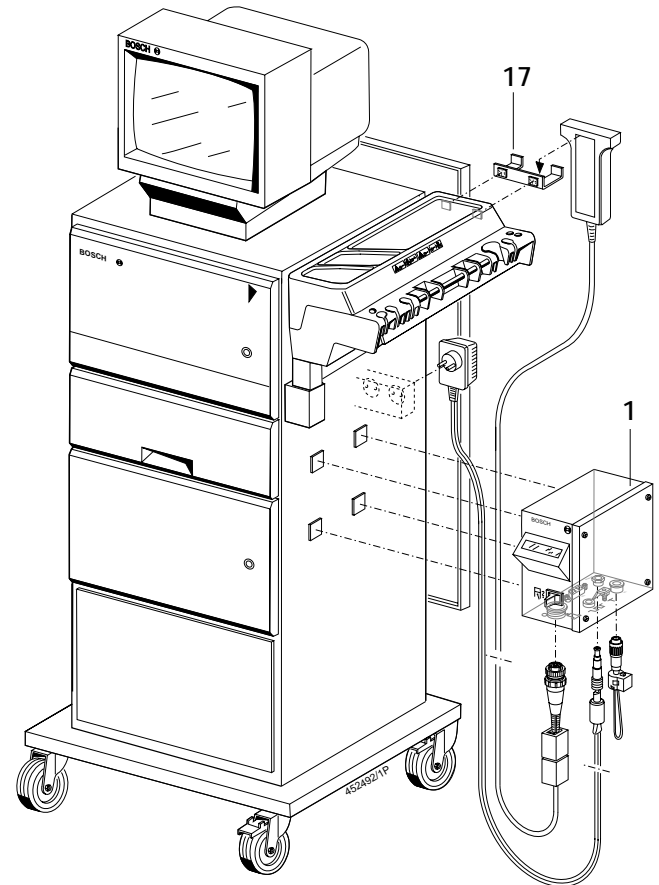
Assembly suggestion, shown here with FSA 560, 3.140 etc.
